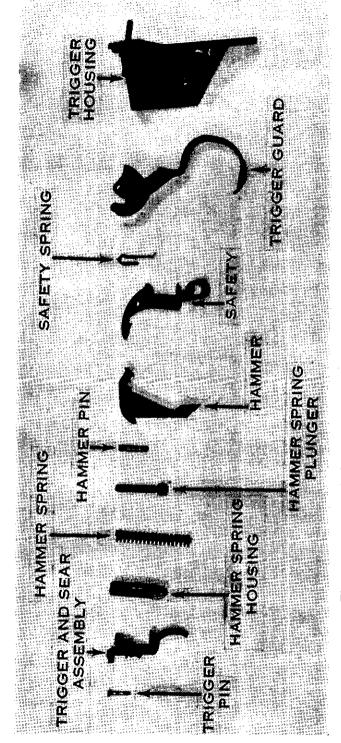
Parts of the firing mechanism assembly in the order of disassembly.
